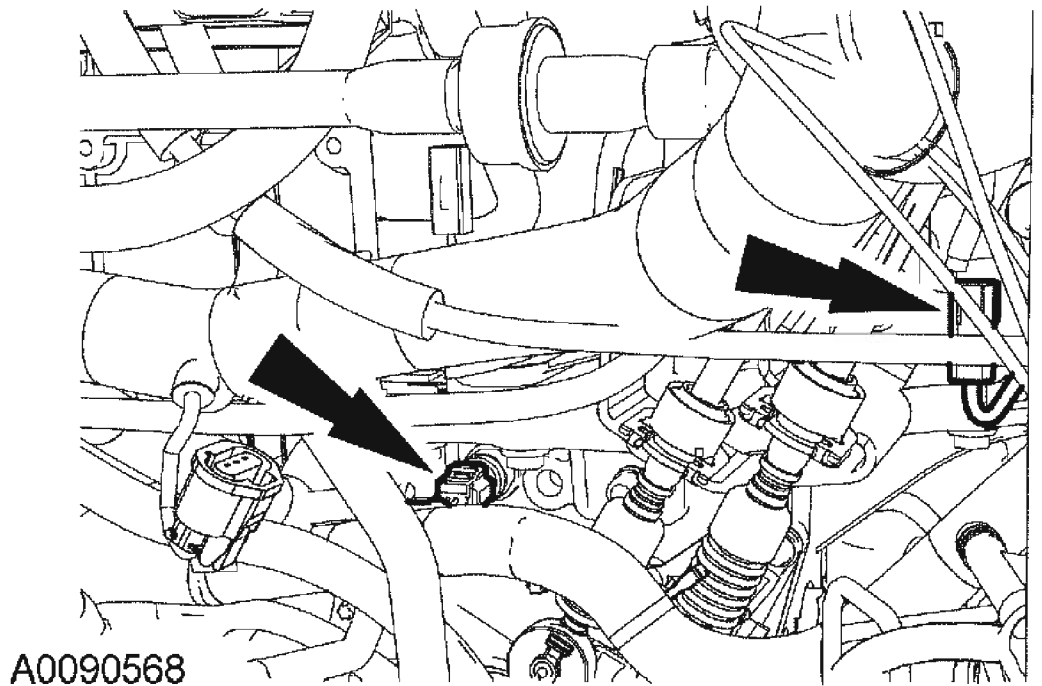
Removing Air Cleaner Outlet Tube
